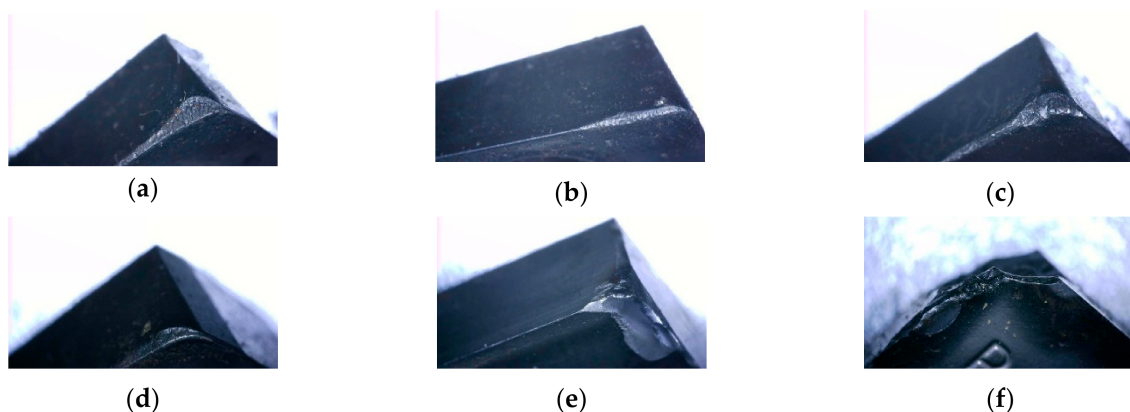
Typical defects of milling tools: (a) Crack wear; (b) Chipping; (c) Groove wear; (d) Flank wear; (e) Crater wear; (f) Breakage.
